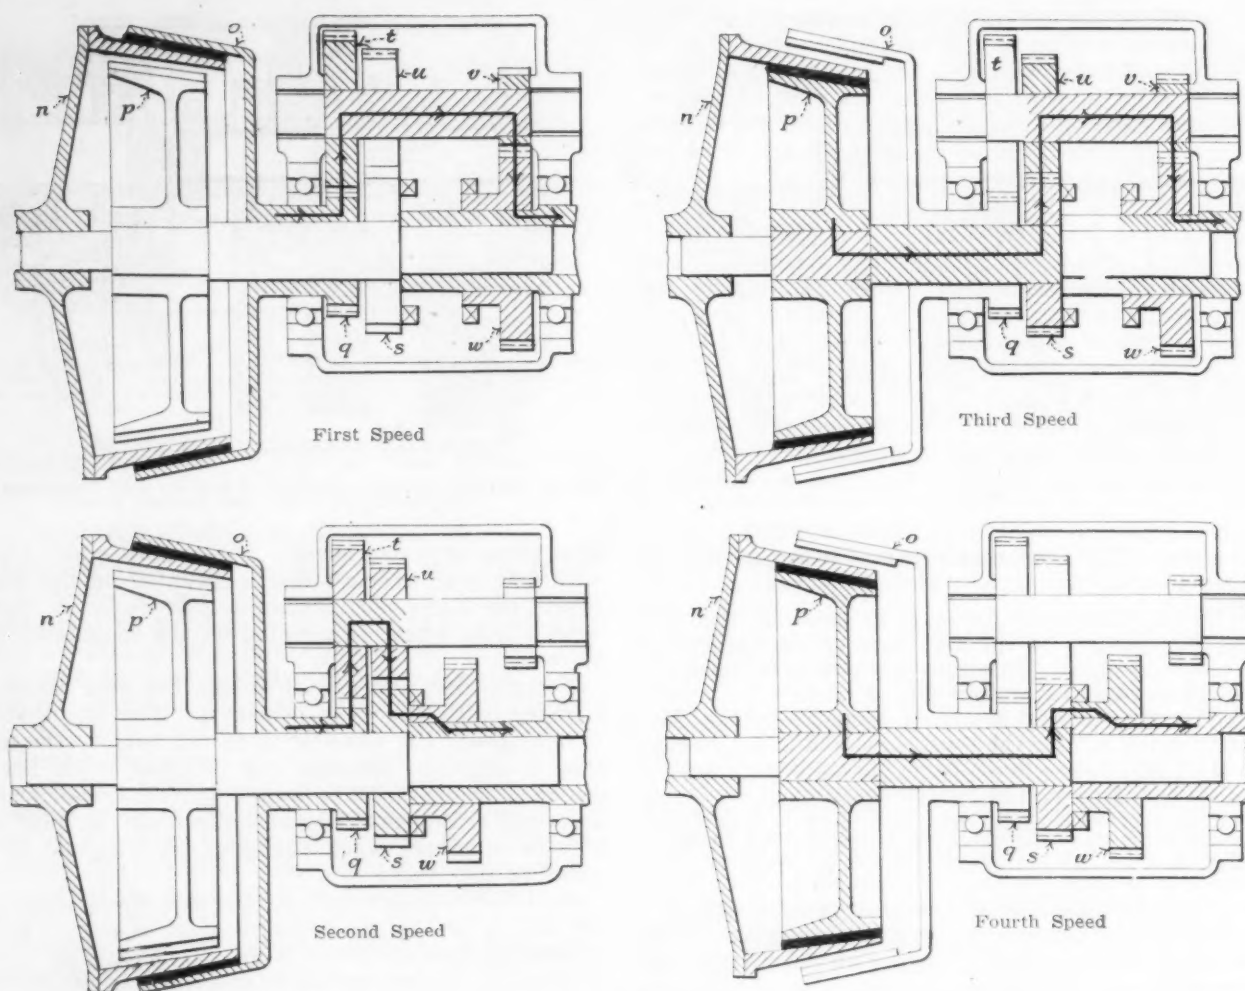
DIAGRAM OF A FOUR-SPEED GEARBOX SHOWING THE ARRANGEMENT OF THE GEARS TO SECURE VARIOUS SPEEDS
